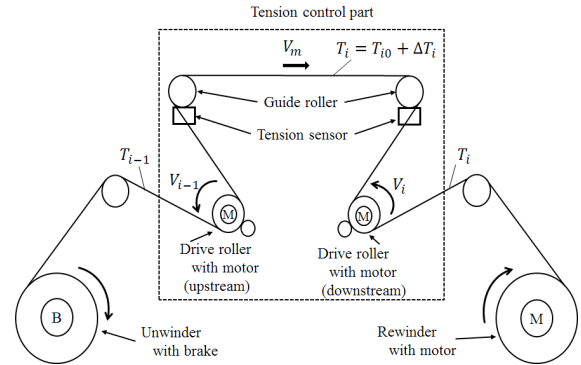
Schematic view of tension control part in the roll-to-roll web handling system
